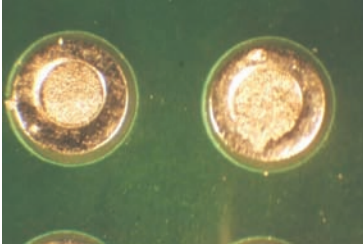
Complete hole fill achieved during stencil printing of paste.
